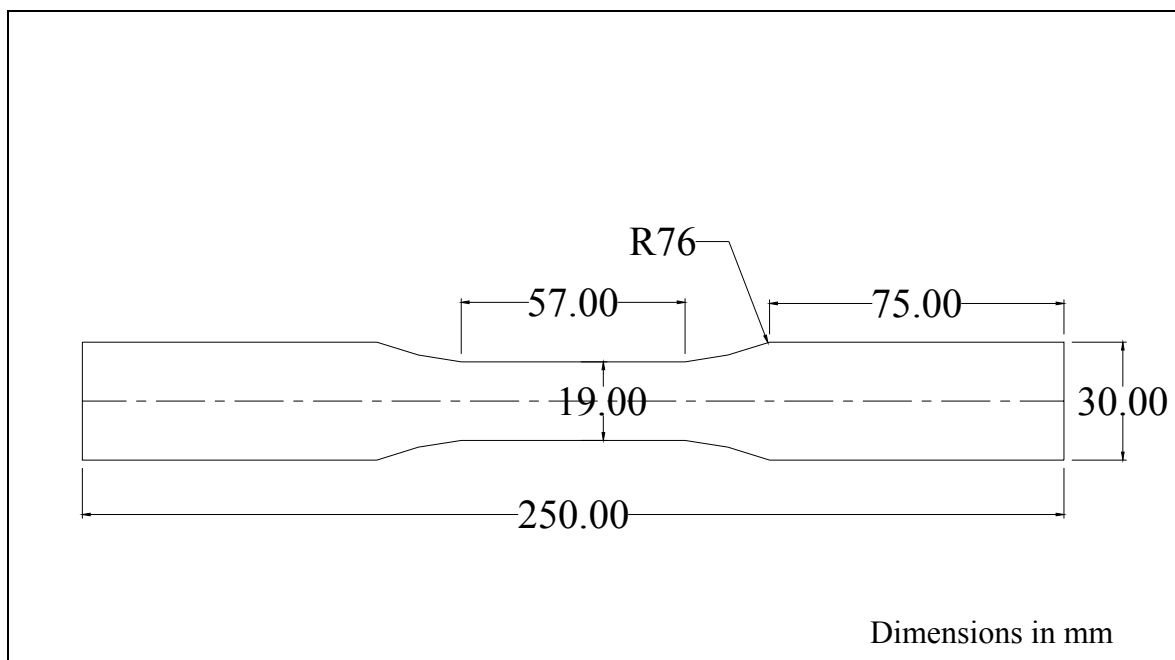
Geometry and dimensions of the tensile specimen used in the study.
